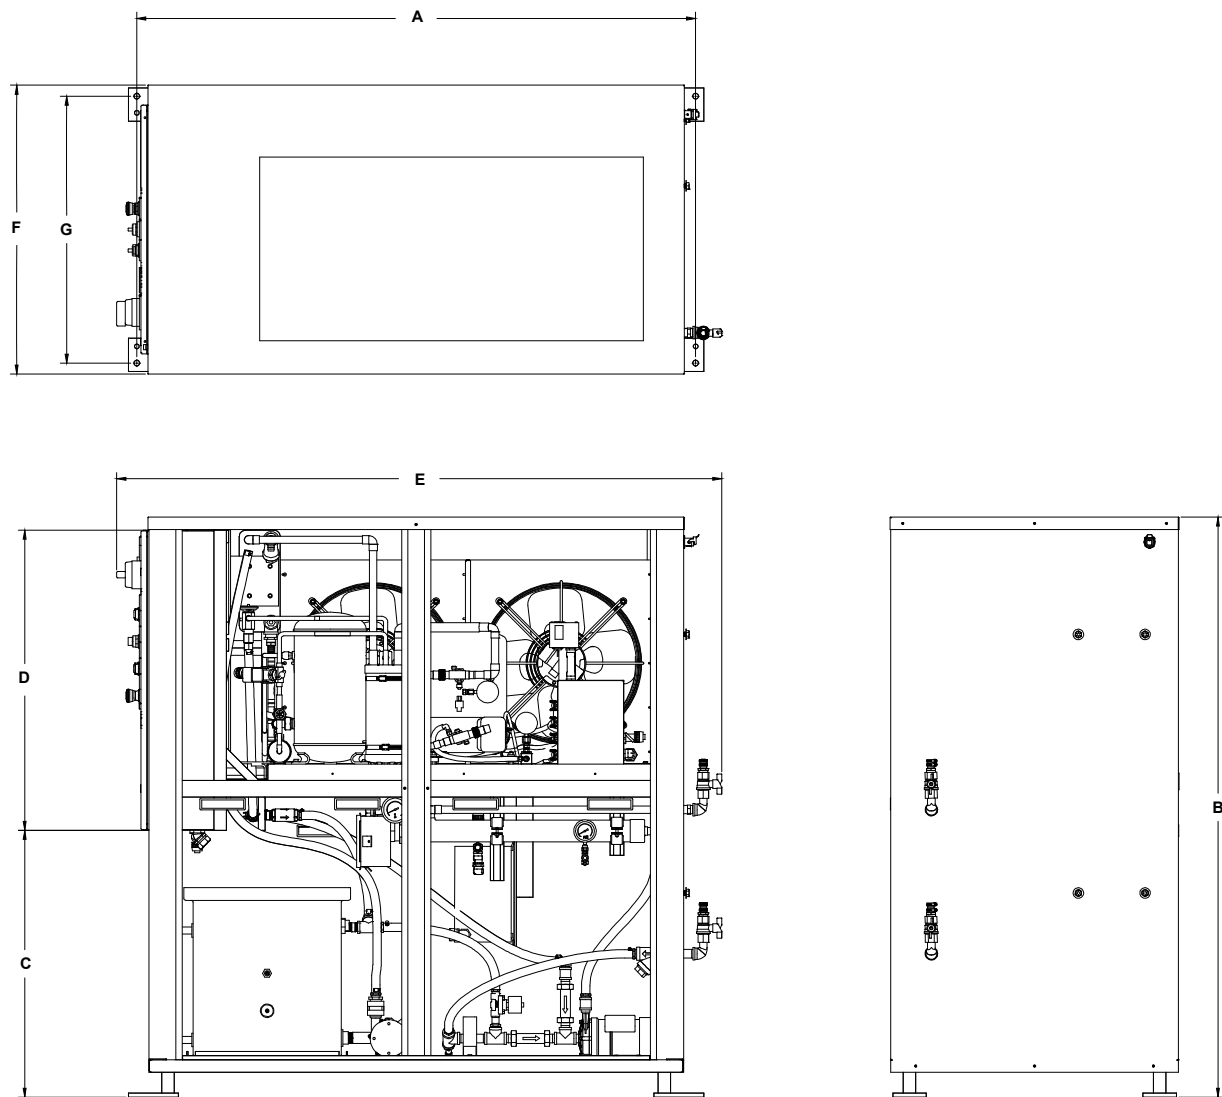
Single-Air Cooled System Without Heat Exchanger Dimensions
